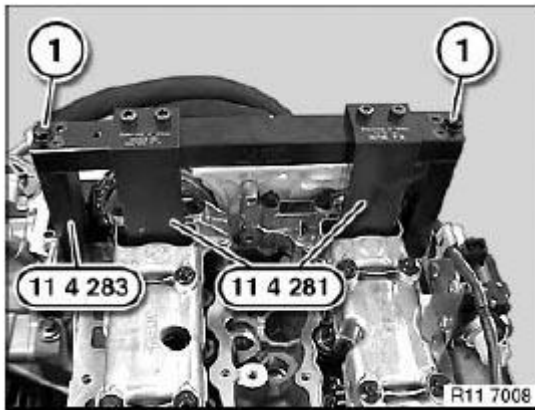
Identifying Special Tools (11 4 281) And (11 4 283)
